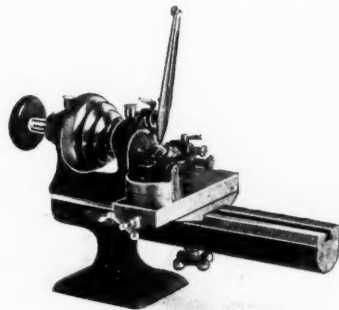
Special Grinding Lathe with Self-contained Measuring Indicator
